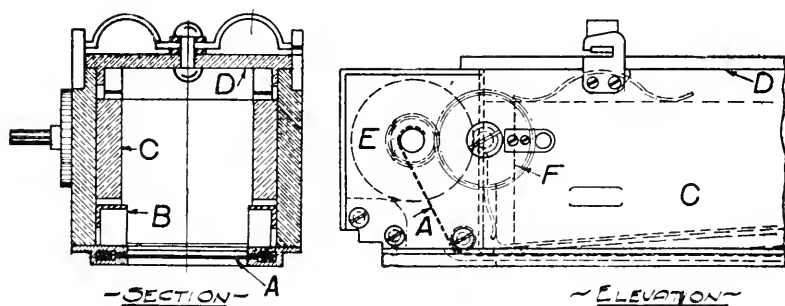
Design of holder for photographic plate. Scale = 1:2
